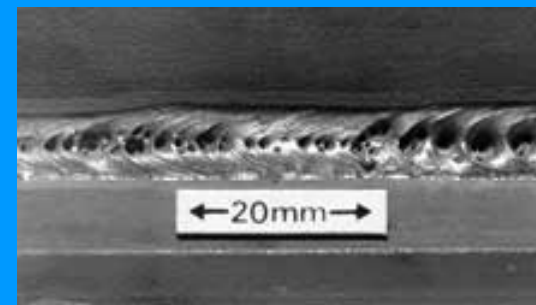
Surface breaking pores (T fillet weld in primed plate)
